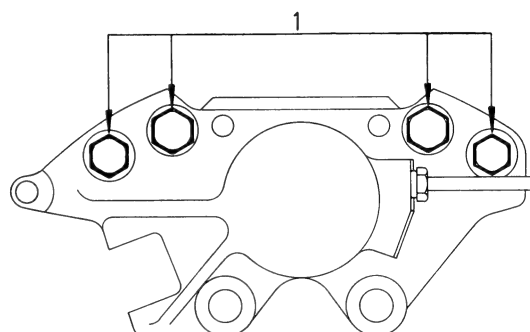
Tightening torques of rear caliper halves (1600 S Cabriolet).
